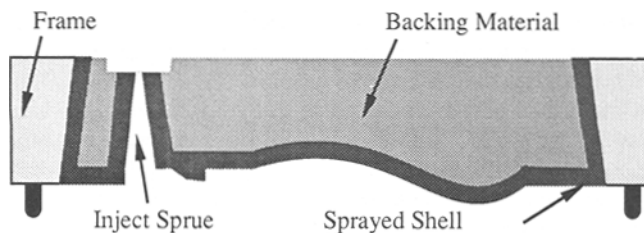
Schematic cross section of a sprayed tool. The frame interior is angled to help support compressive loads on the tool face
